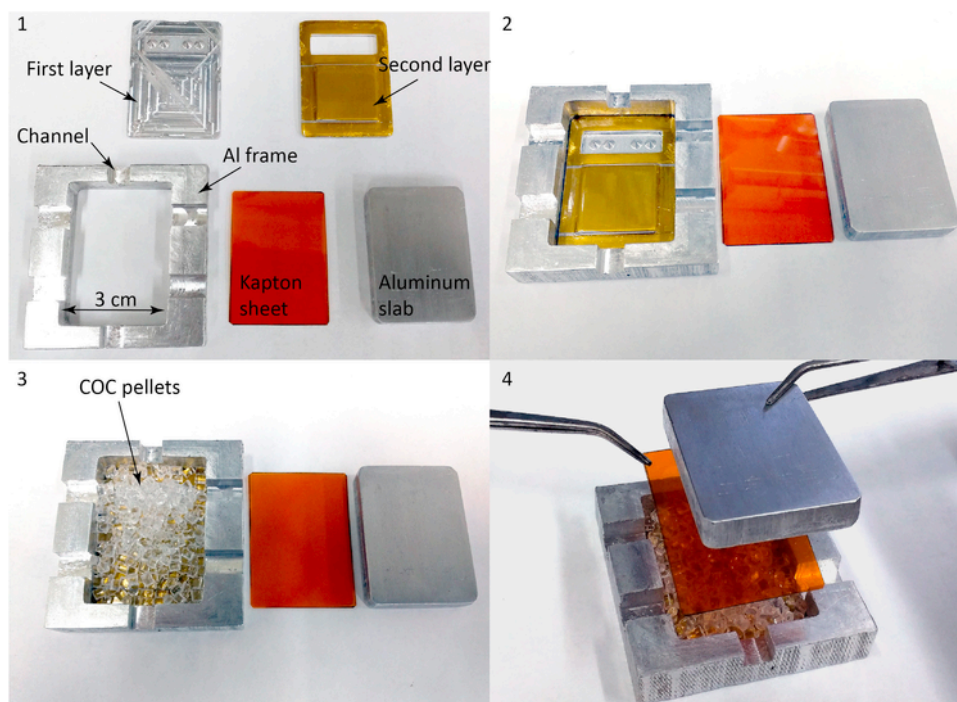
CNC machined aluminium mold for making the COC lid. (1) The second aluminium layer is Kapton taped so demolding will be easier and the surface finish will be transparent. (2) The two layer mold is placed in the aluminium frame. (3) COC pellets are loaded in the mold. (4) A sheet of Kapton is first placed on top of the pellets followed by placement of the aluminium slab. The assembly is ready for applying heat and pressure.
